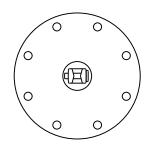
DIAPHRAGM ASSEMBLY (BOTTOM VIEW)
